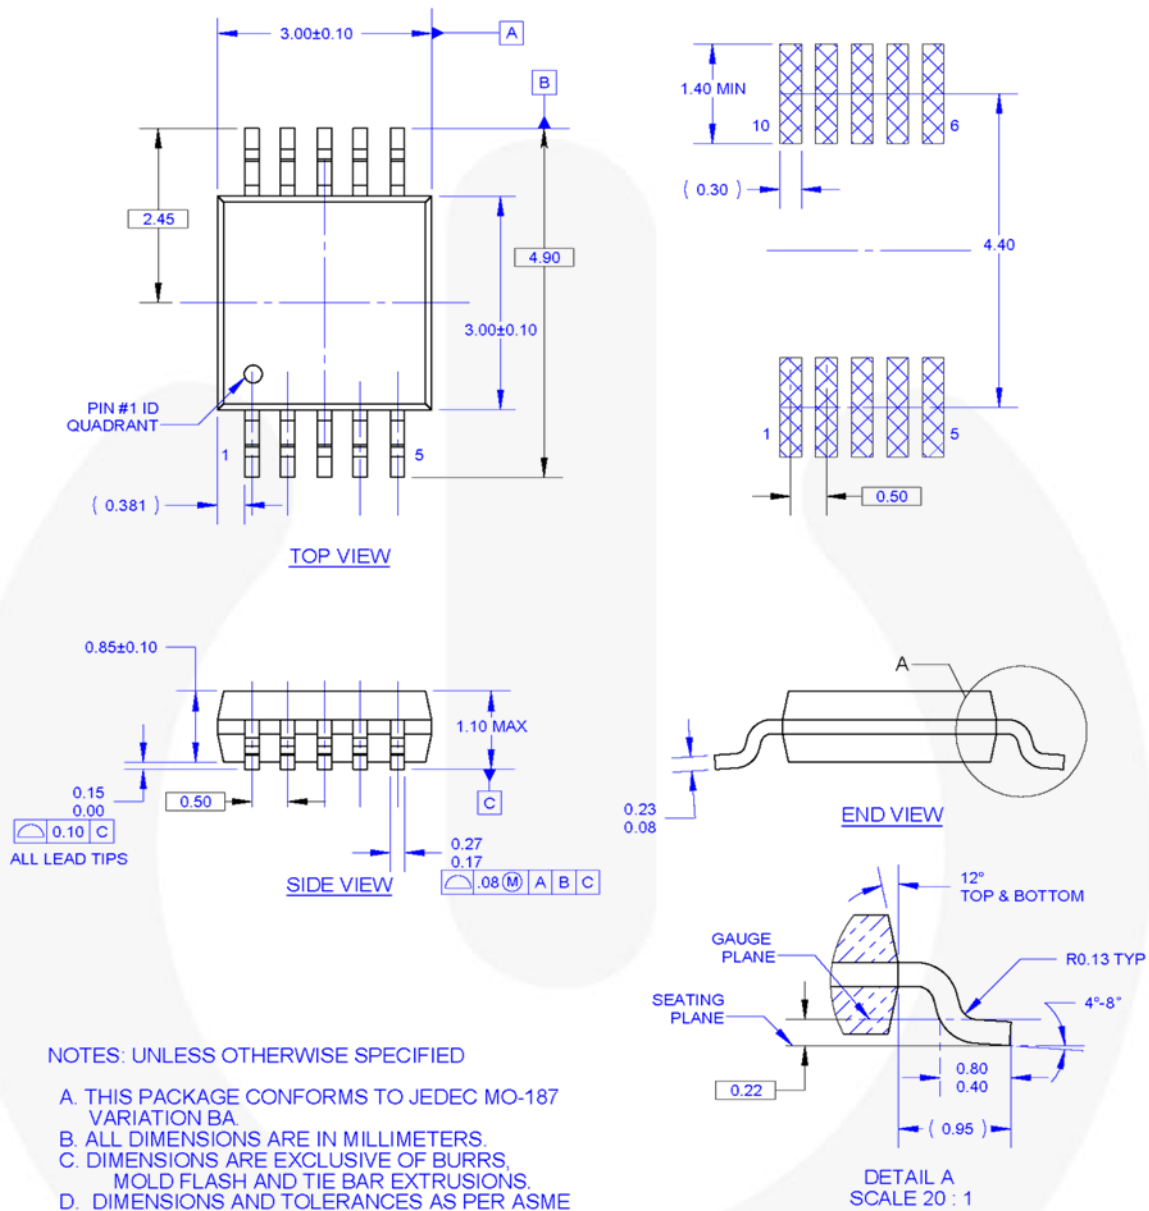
10-Lead, Molded Small Outline Package (MSOP)
